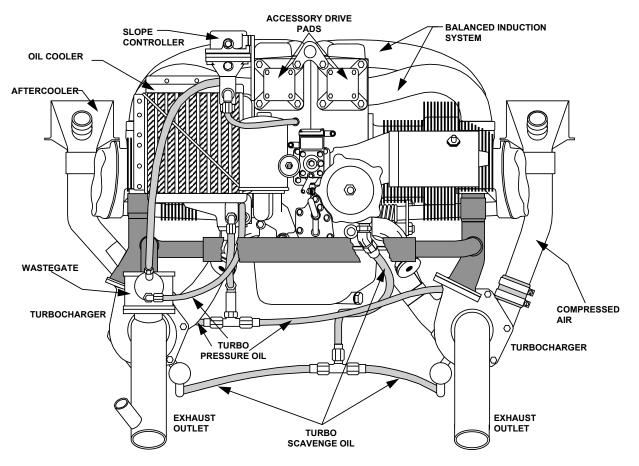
Turbocharger Lubrication System - TSIO-550-E Rear View
